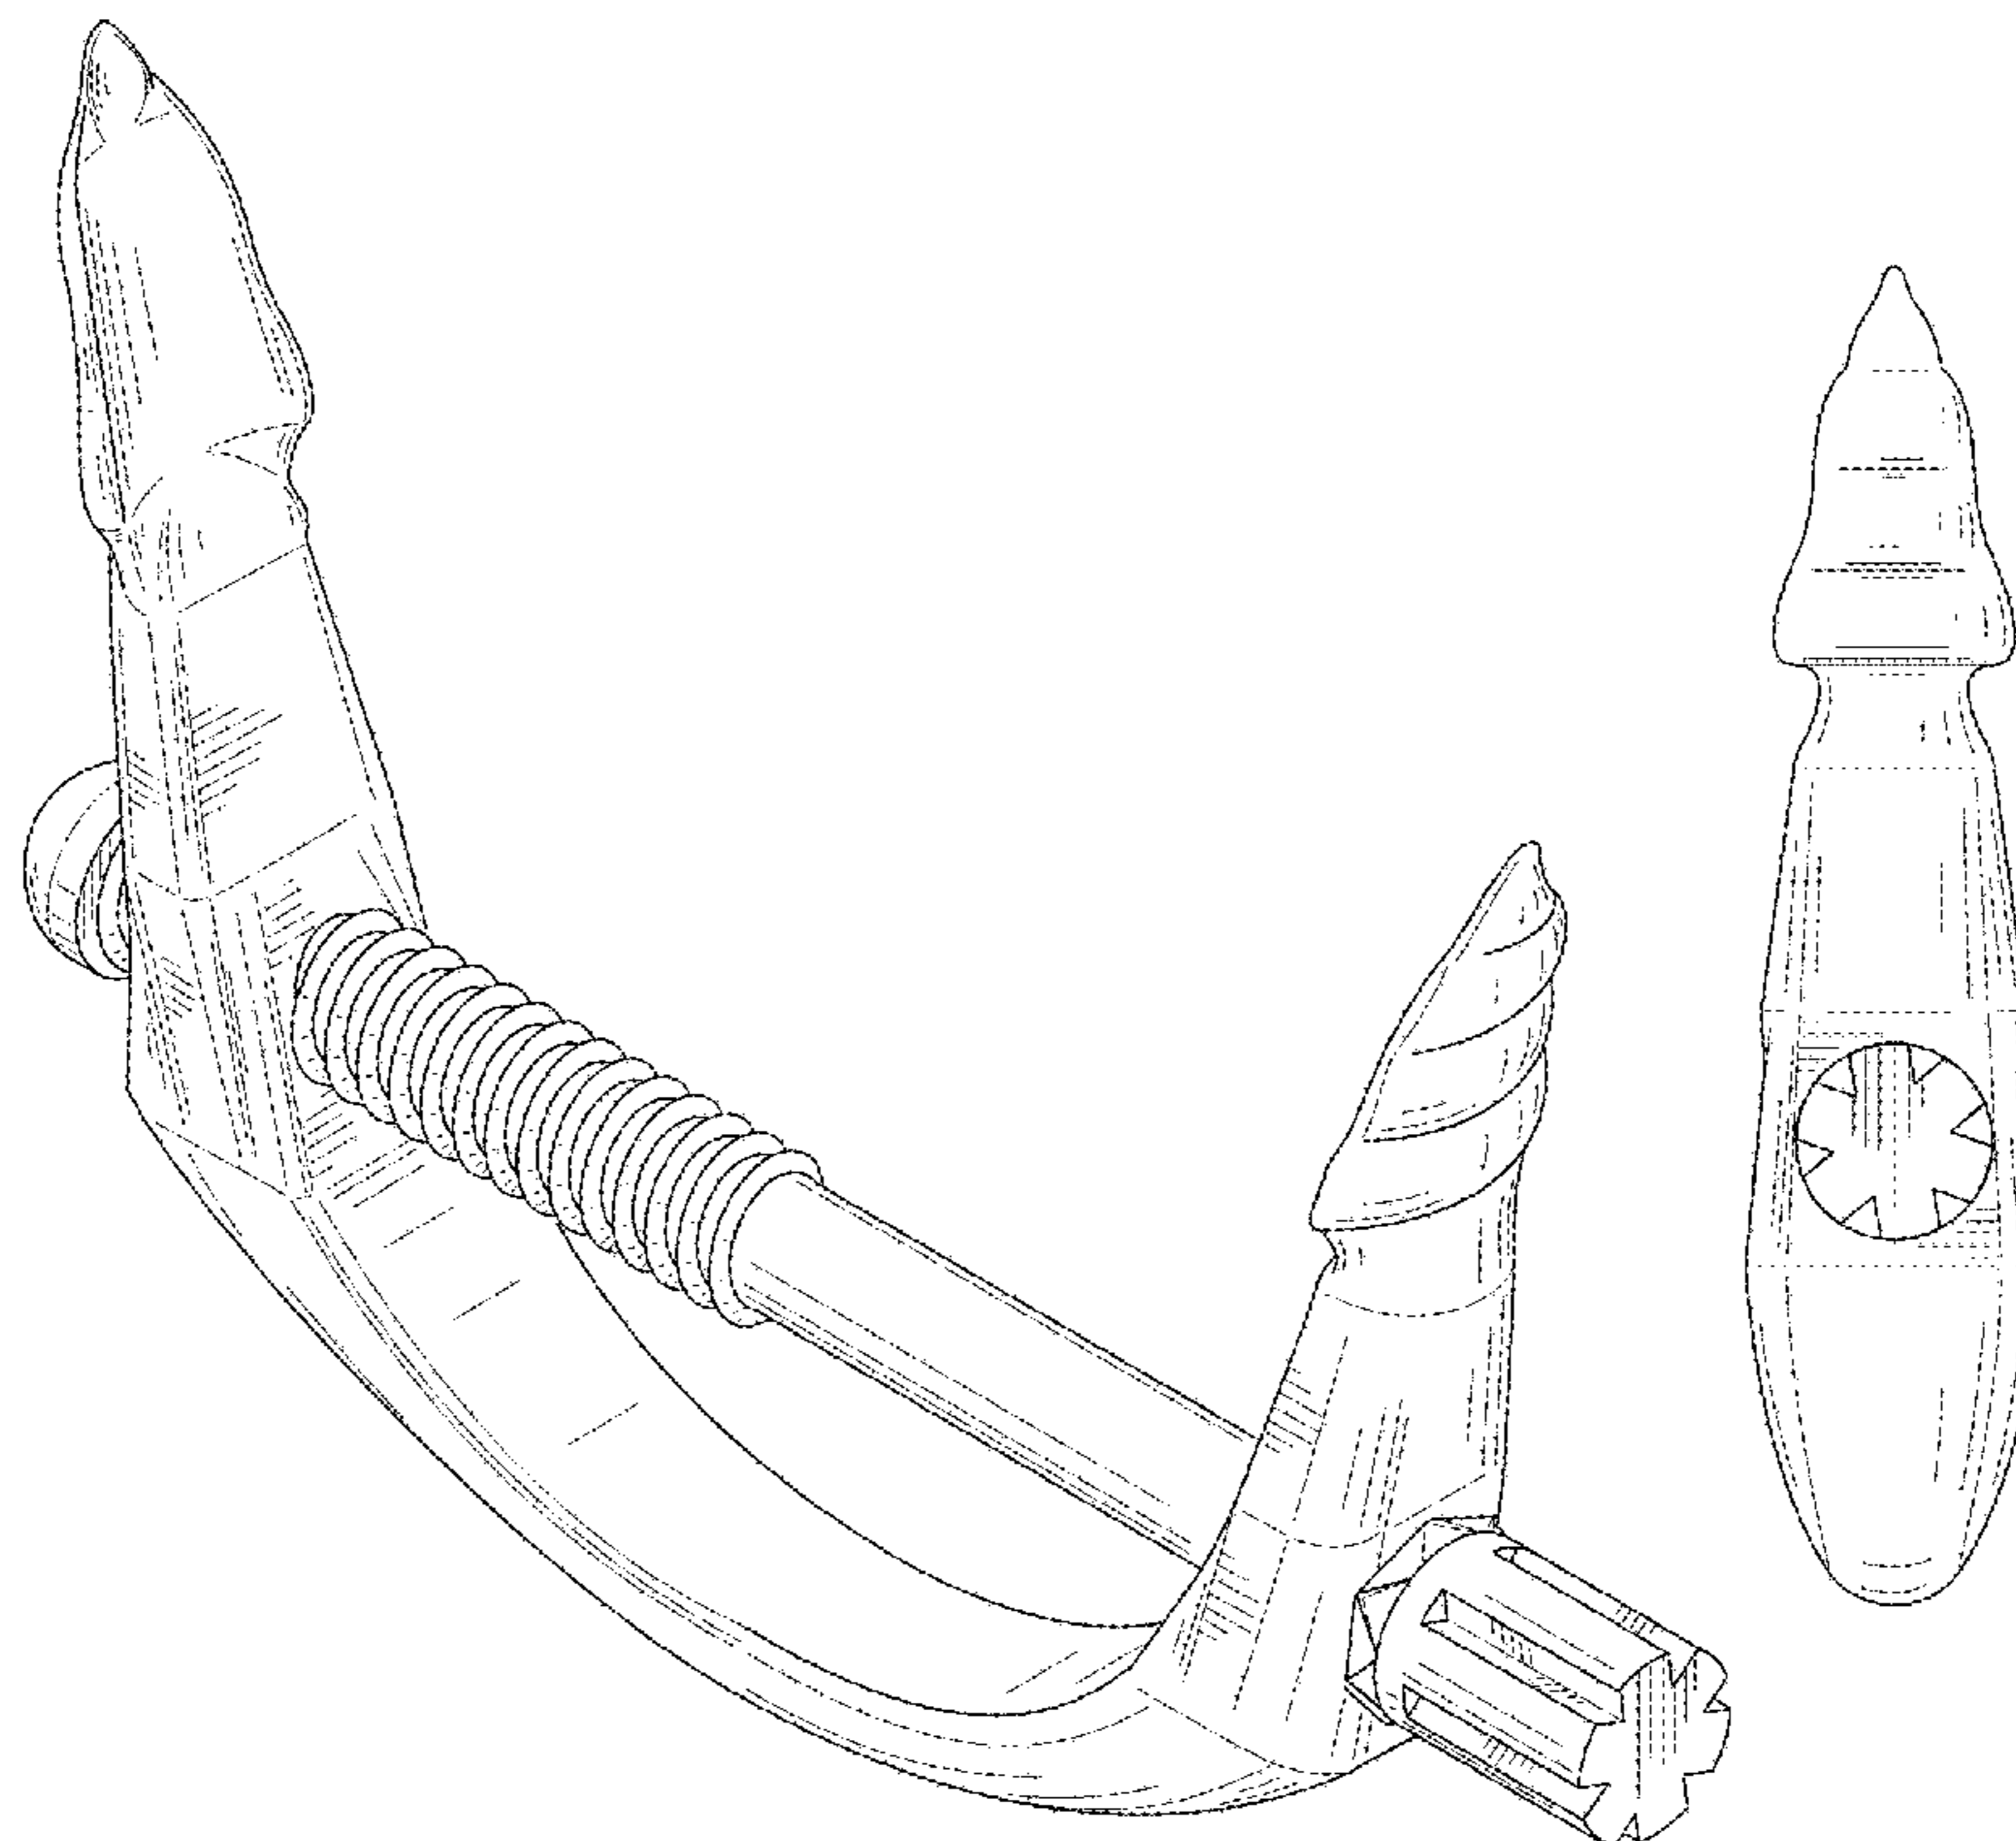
is a side view of the nasal dilator shown in FIG. 1;
